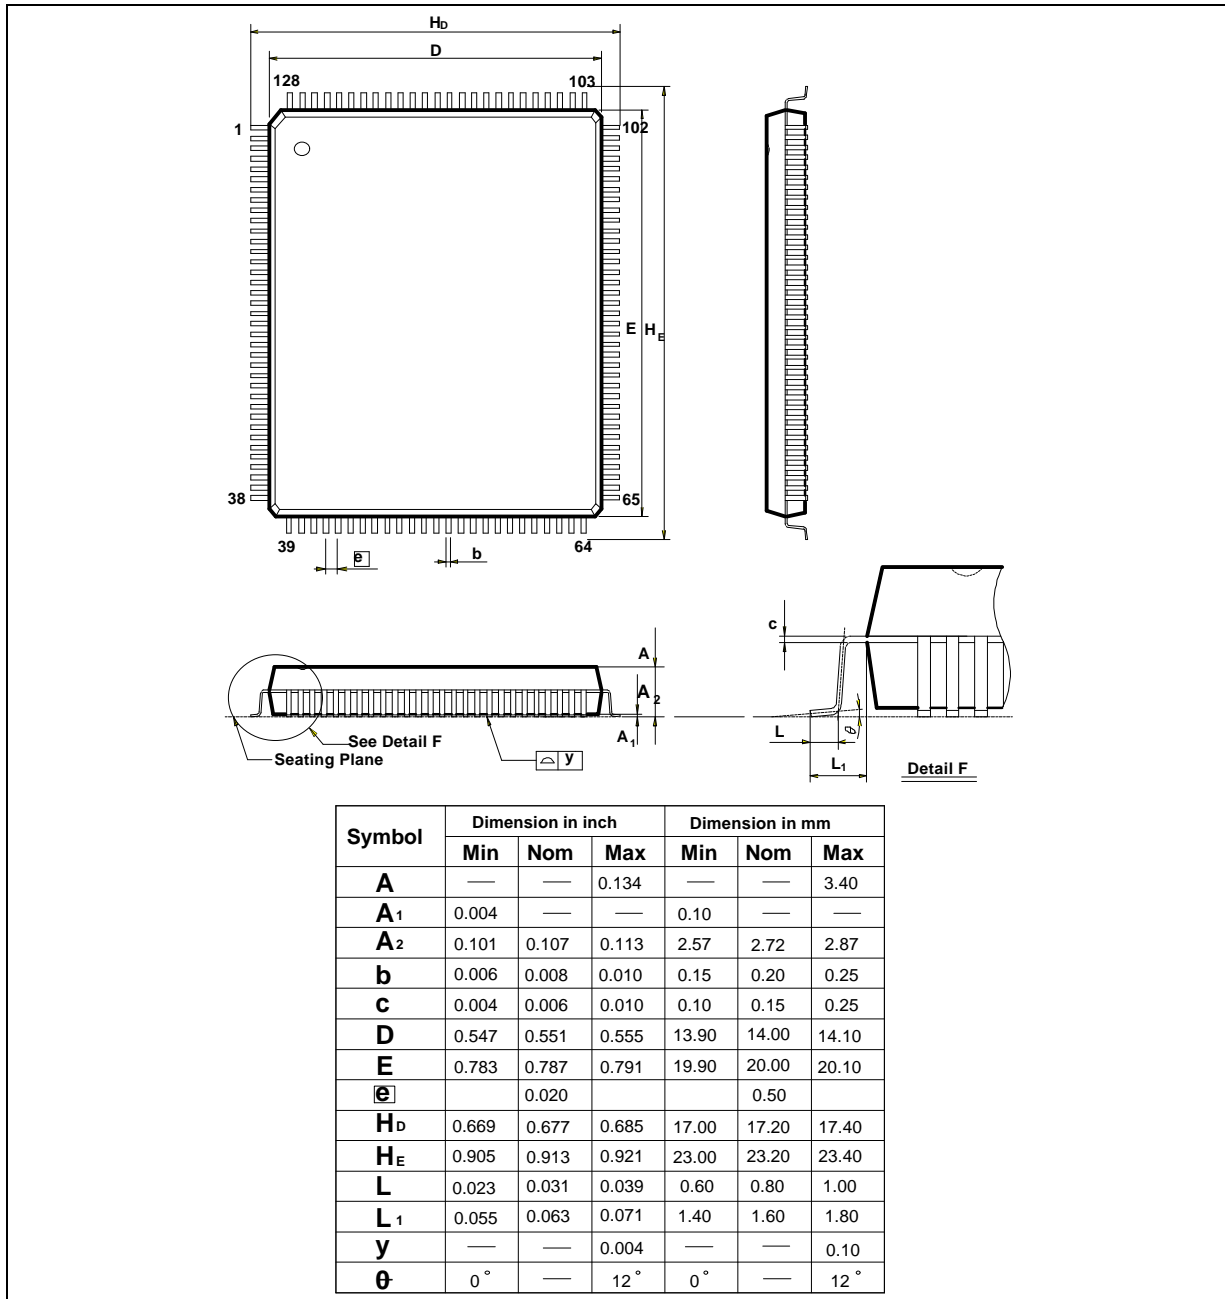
128L QFP (14x20x2.75mm footprint 3.2mm) Dimensions
